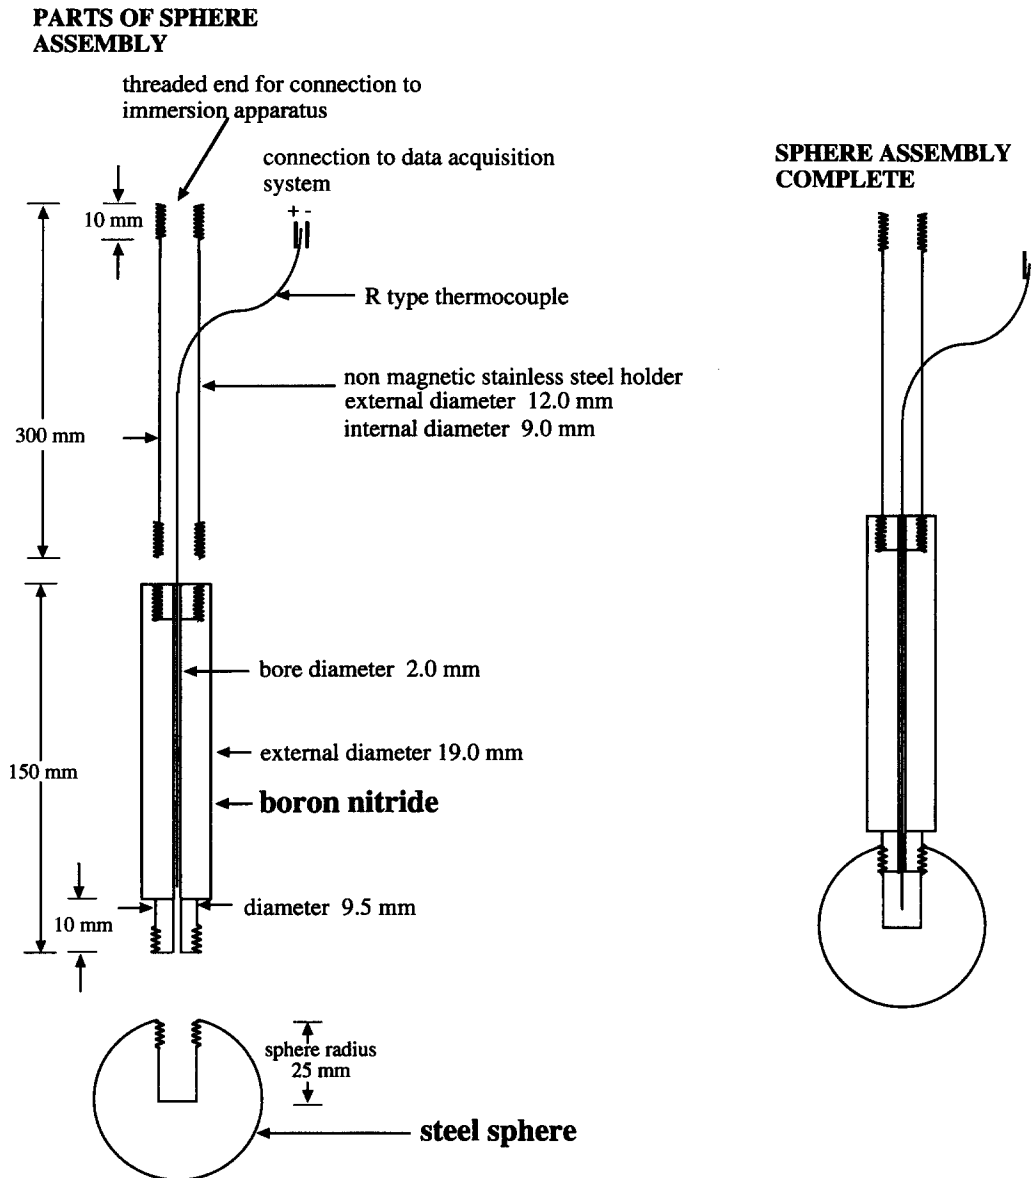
Schematic diagram of various parts of assembly and a complete sphere assembly for steel experiments.
